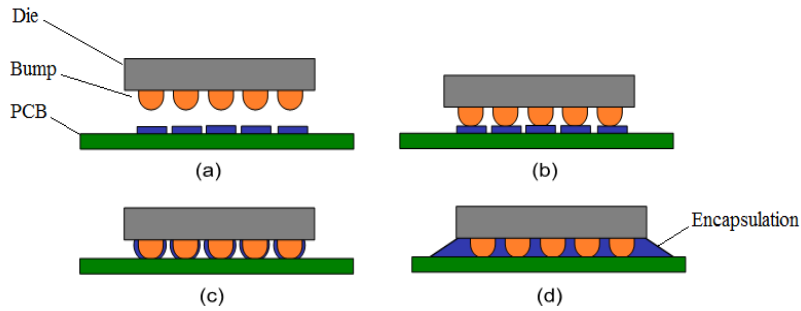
Illustration of flip-chip technology. Flip-chip package with (a) solder-plated metal balls and pads on PCB; (b) flux application and placement; (c) reflow soldering; (d) underfill
